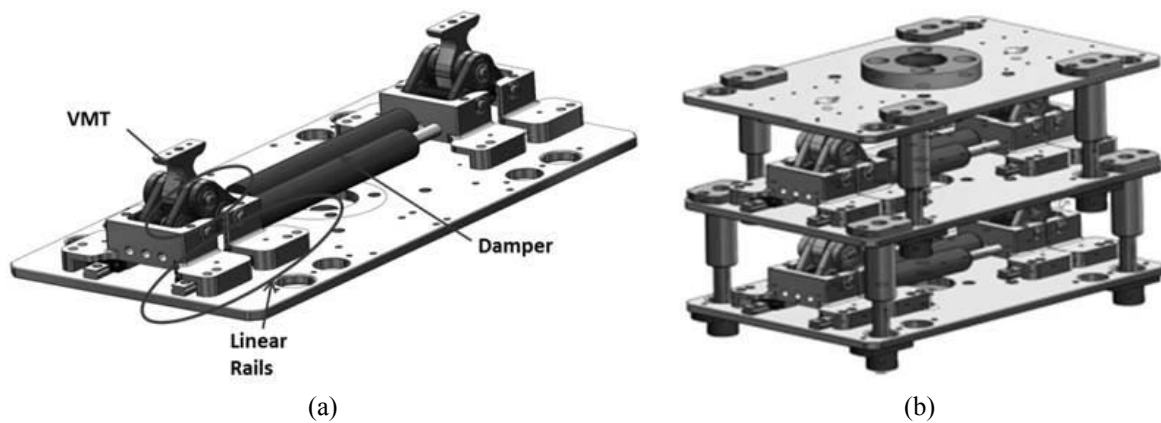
CAD model of prototype showing (a) one layer, and (b) two layers stacked
